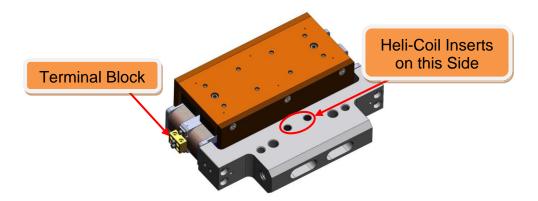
Bolt Coil Support to Actuator Bobbin. Set orientation as shown above, using locations of Bobbin terminal block and (2) Heli-Coil inserts in Coil Support for reference. Make sure pins in Bobbin mate properly with hole and slot in Coil Support.
